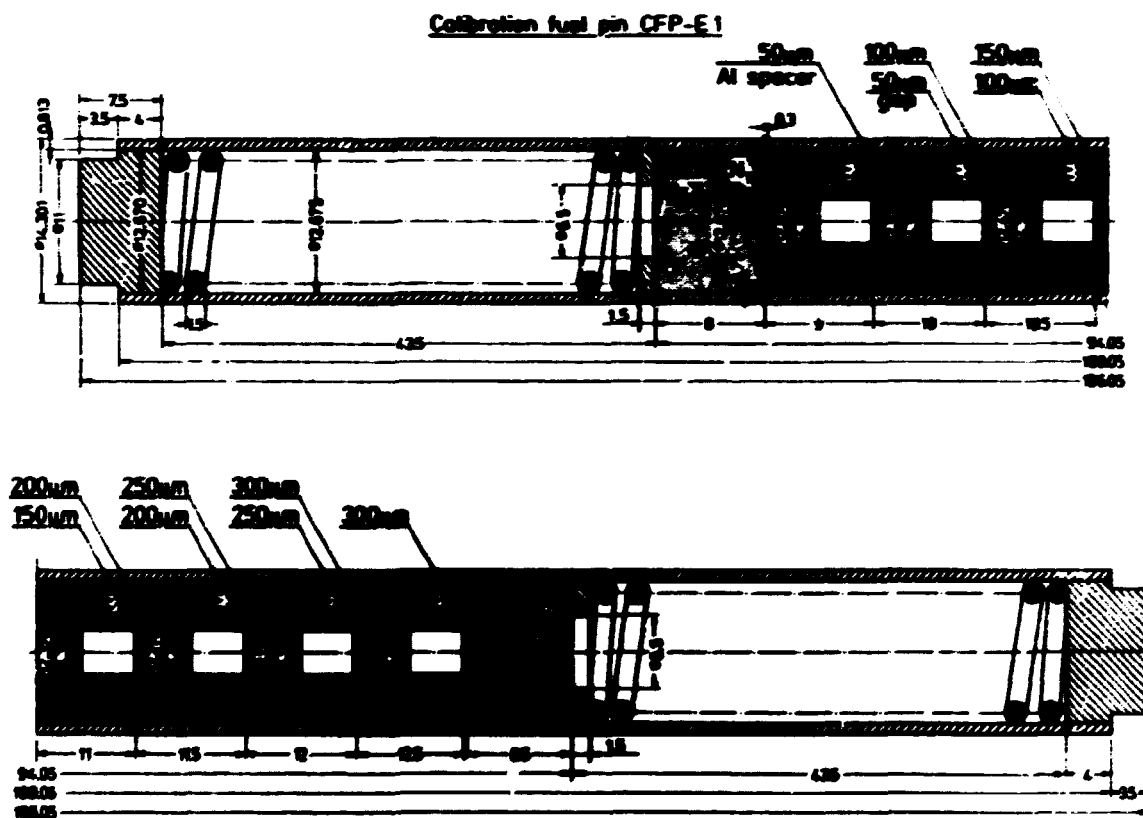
Calibration fuel pins for testing the accuracy of dimensional measurements.
